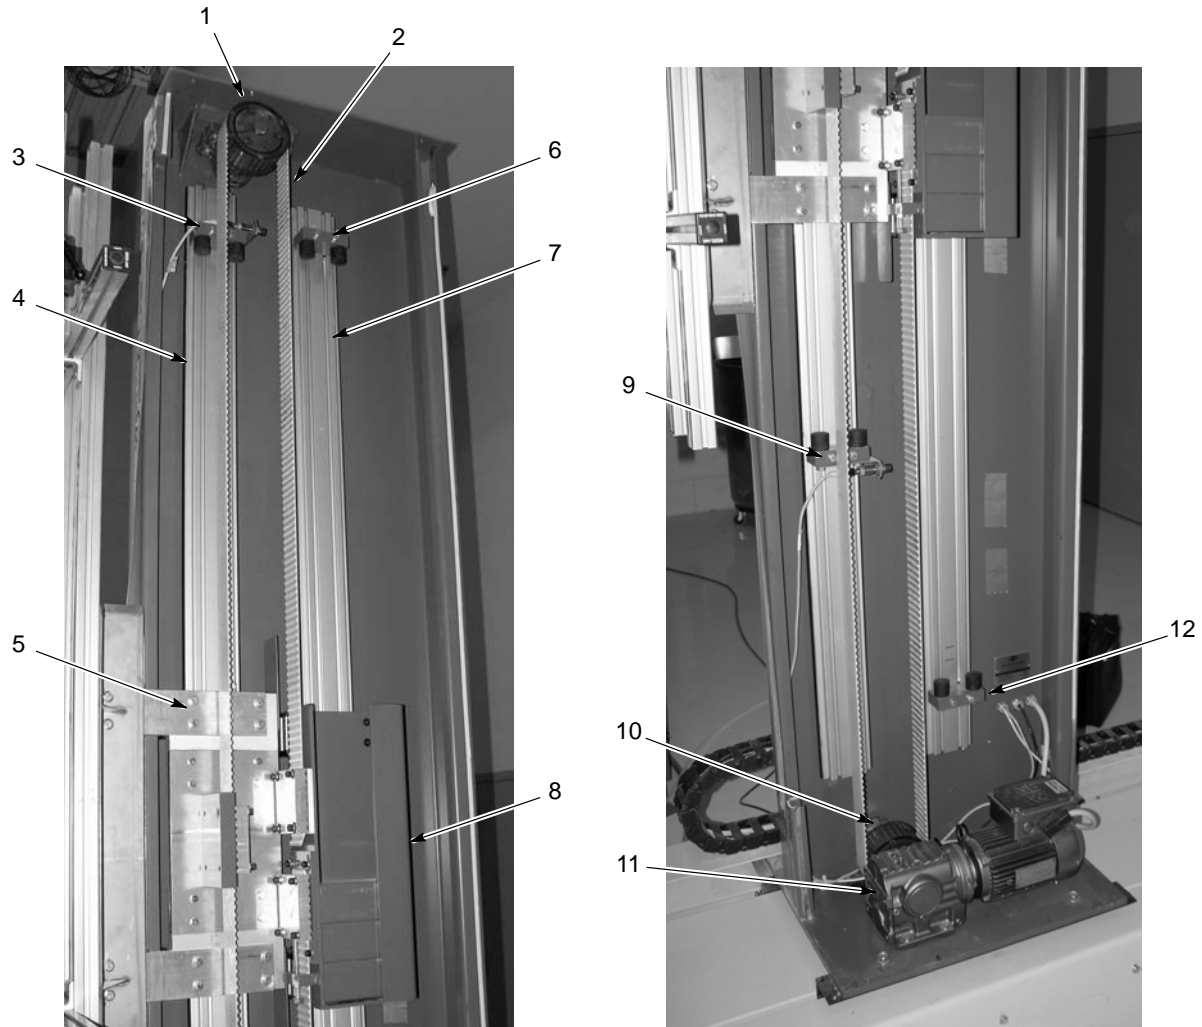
Reciprocator with cover removed, mounted on in/out positioner
